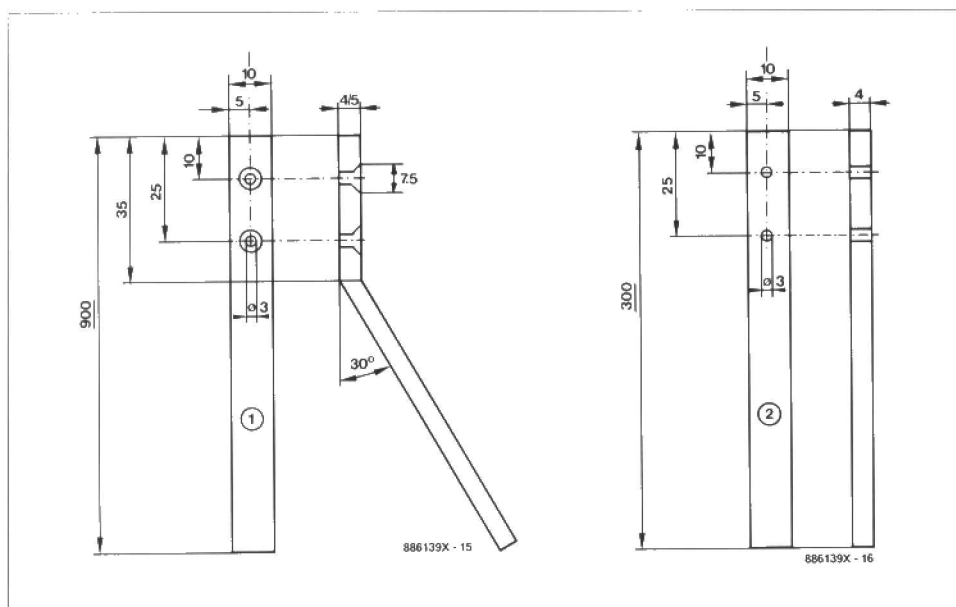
Cutting and drilling details of a ground rod (left) and a radiator element (right).
